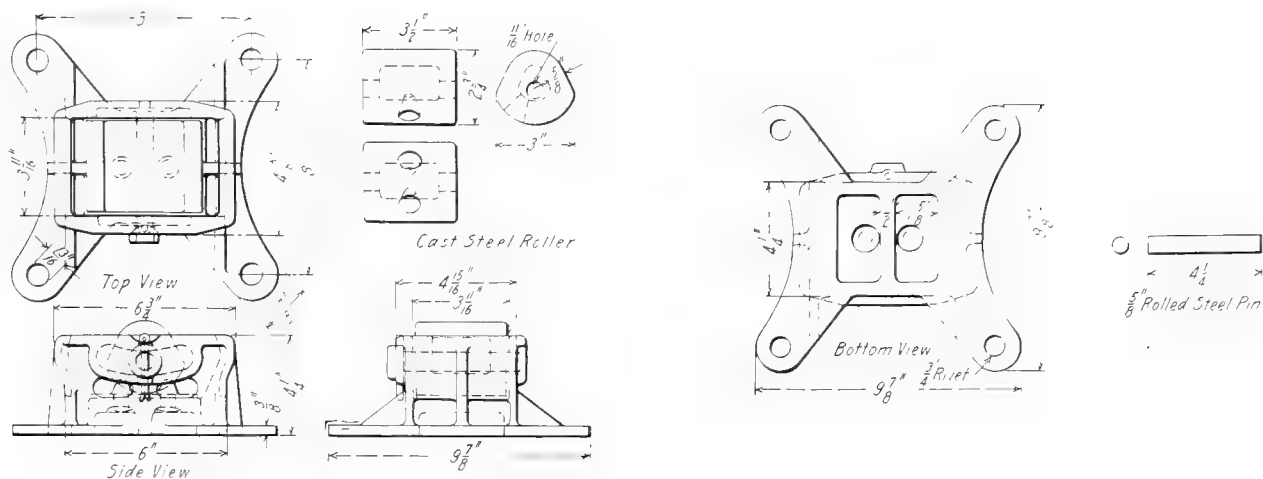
Wine Self-Centering Roller Side Bearing. Equipment Improvement Company.
